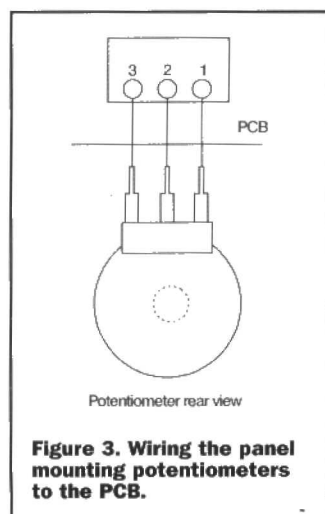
Wiring the panel mounting potentiometers to the PCB.
